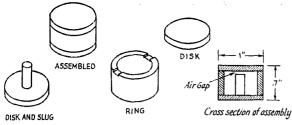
Component parts and assembled pot core (Ferroxcube D-25/17,5).
